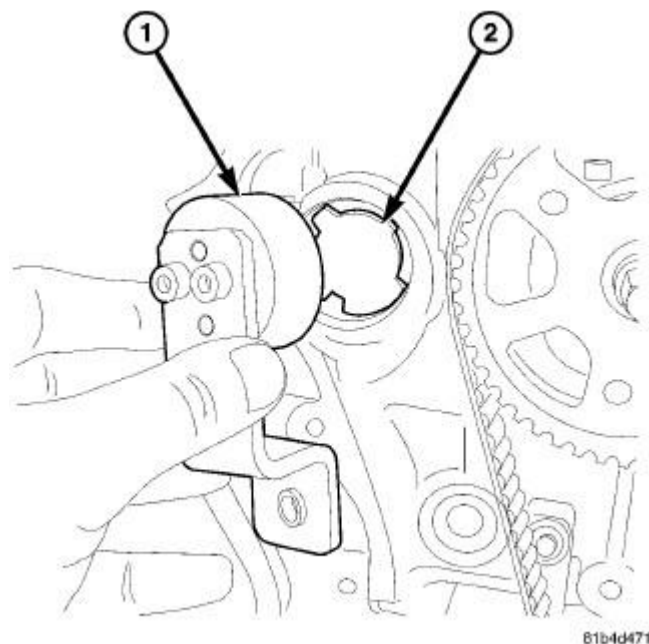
INSTALLING CAMSHAFT LOCK TOOL
